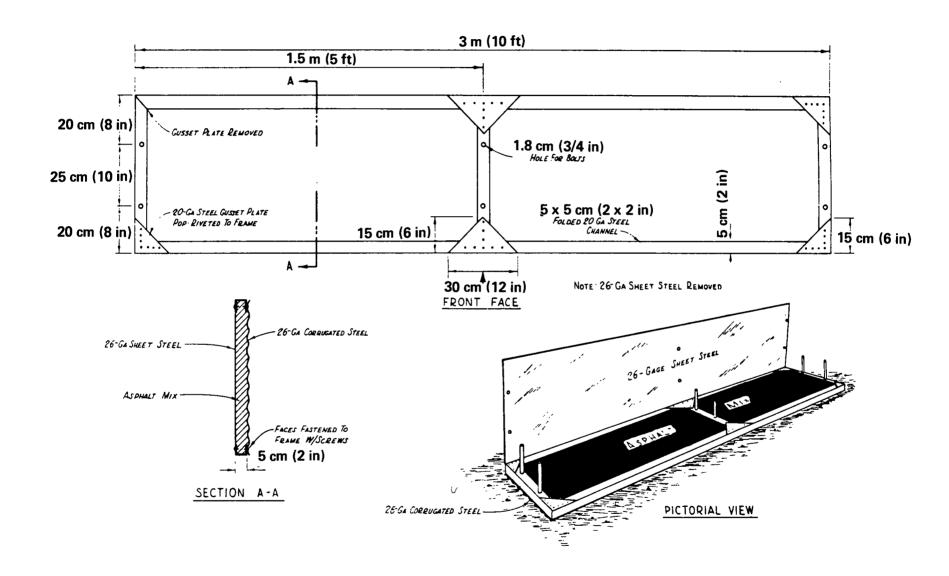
Details of plastic armor plate panel 1 (sheet steel with metal frame).
